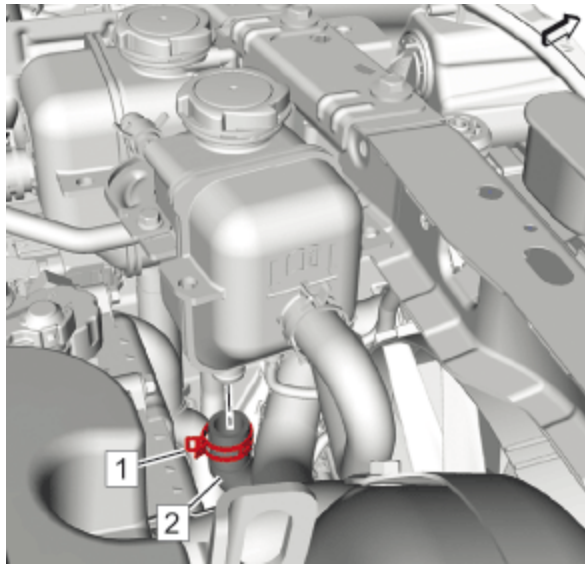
Drive Motor Battery Coolant Pump Inlet Hose
